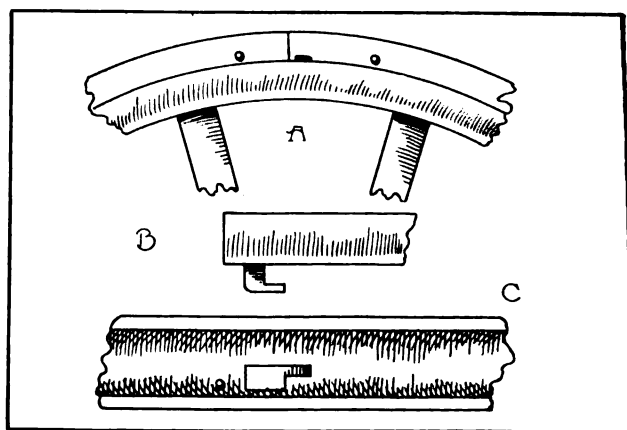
Goodrich Quick Detachable Rim: A, the Split Ring in Place; B, Locking End of Ring; C, Showing Recess into Which B Was Inserted by Special Tool.
